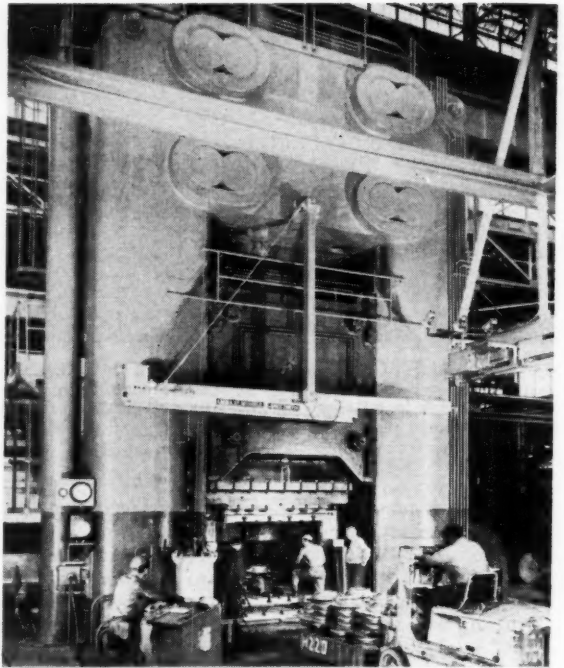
Shown here is the giant forging press which recently began production at the Cleveland, Ohio, works of Aluminum Company of America. Capable of exerting 8000 tons pressure for forging aluminum into vital aircraft parts, the press rises 38 ft above the floor and weighs almost 4,000,000 lb.
